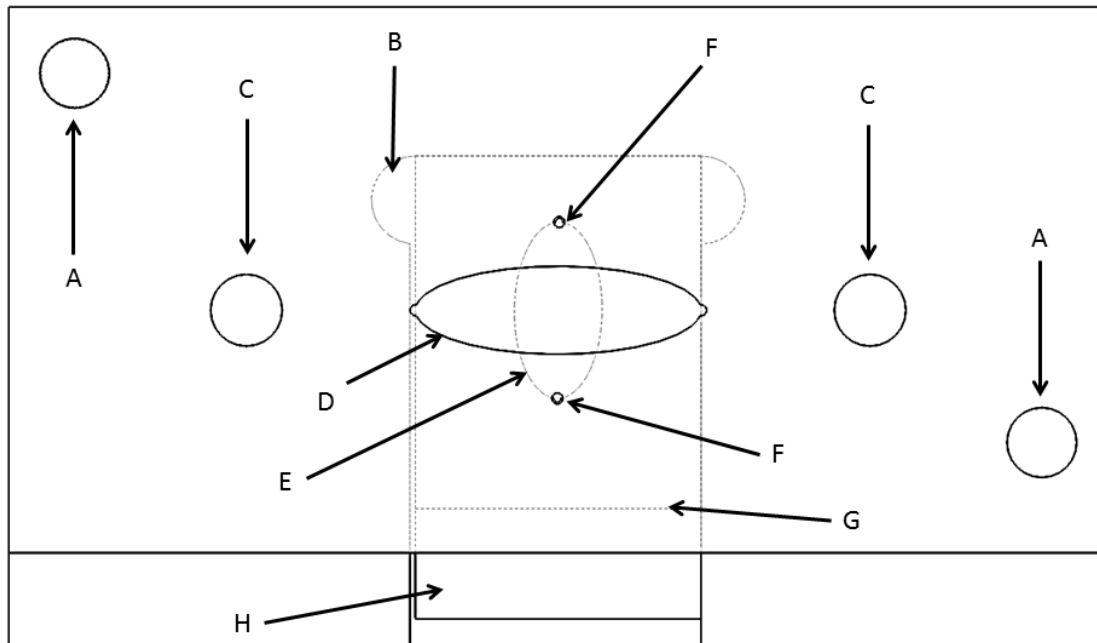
Top view of the bottom flow cell and thin membranes included in the design; Alignment pin holes (A); machining relief features (B); screw holes (C); counter flow geometry in rubber gasket (D); thin-layer volume (E) defined in the chip gasket (G); fluidic ports in membrane layer for analyte stream (F); sensor (H).
